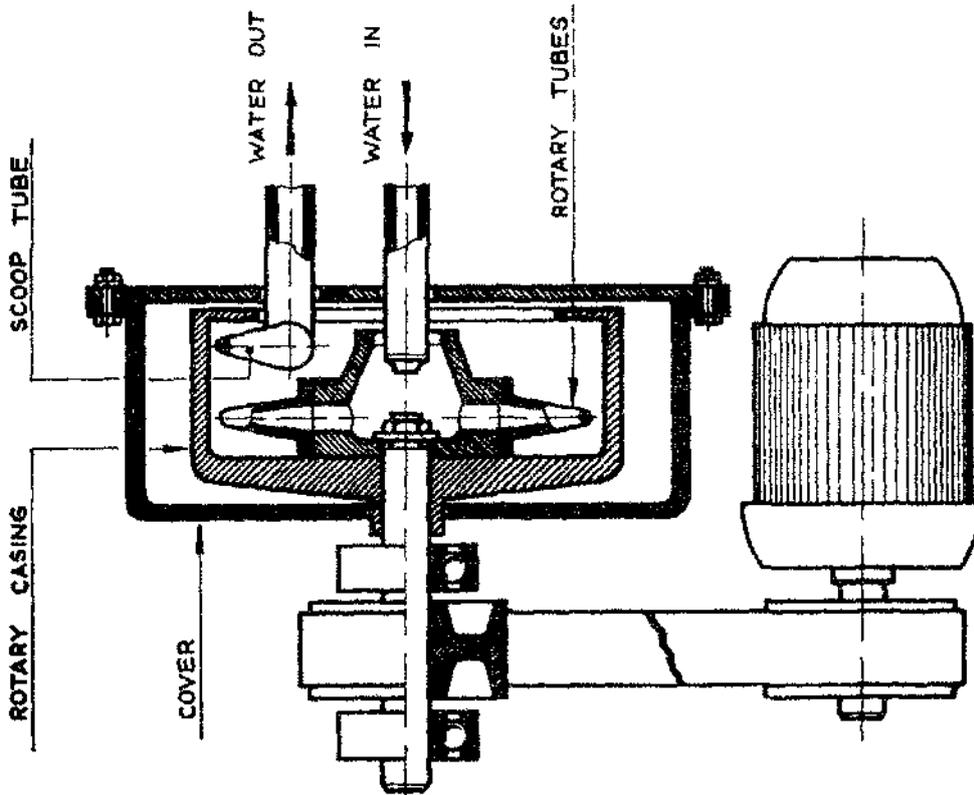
Sketch of a Belt Driven STV-V Pump.
